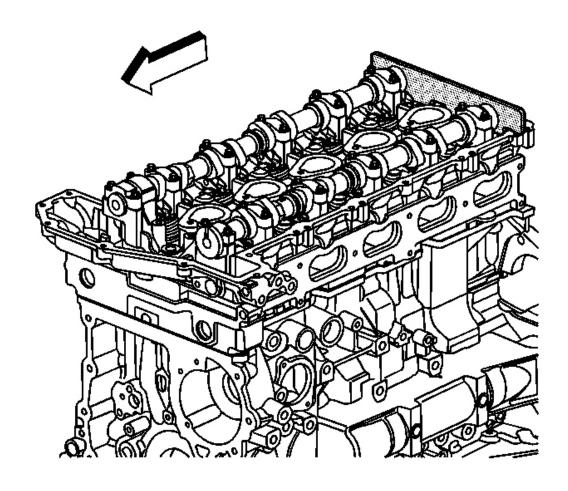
View Of J 44221 Installed On Camshafts Courtesy of GENERAL MOTORS CORP.
